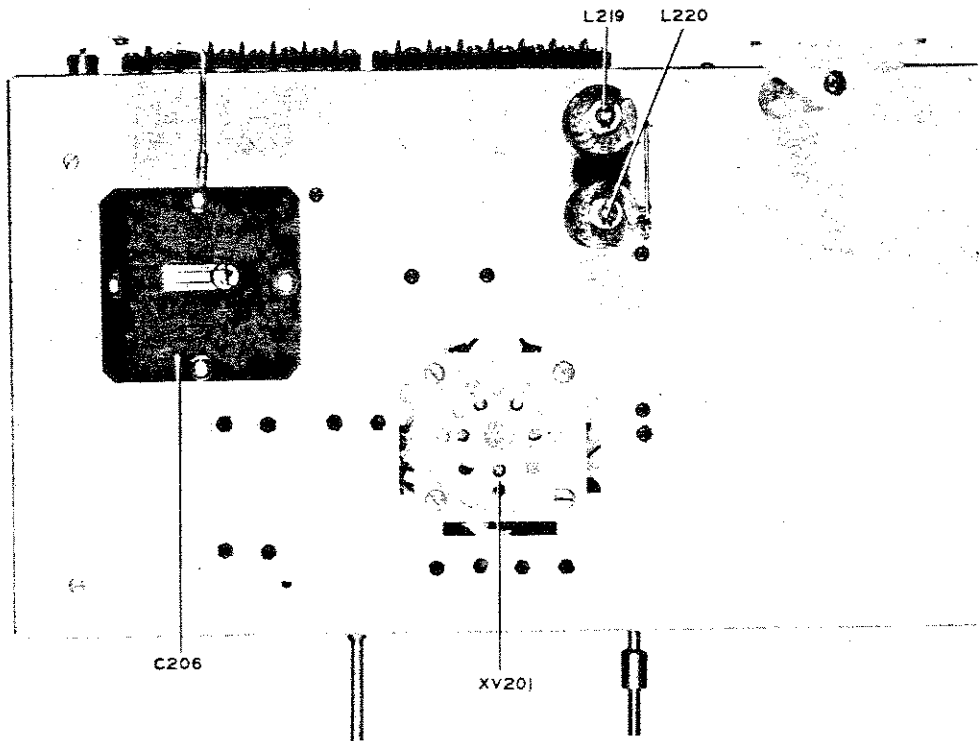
POWER AMPLIFIER TUBE CHASSIS, TOP VIEW
